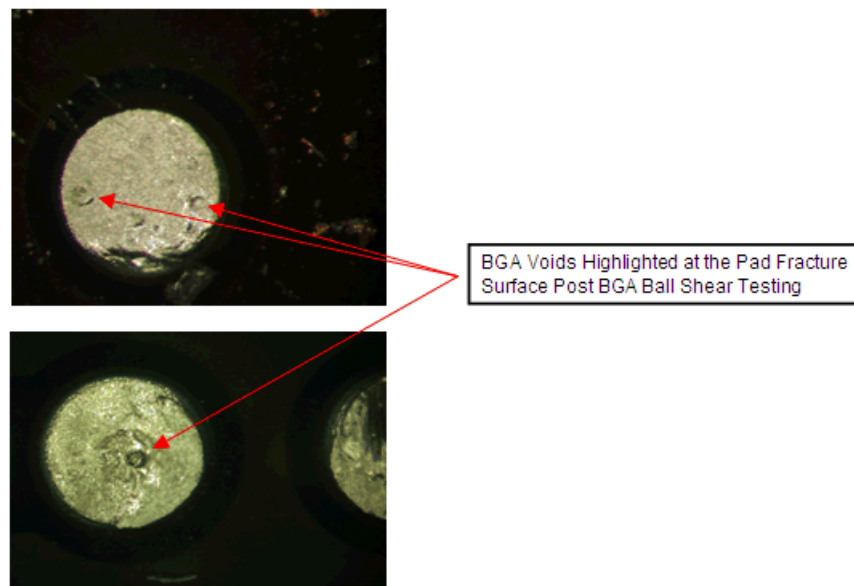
Images of the Fracture Surface of a BGA Pad After a Ball Shear Test
